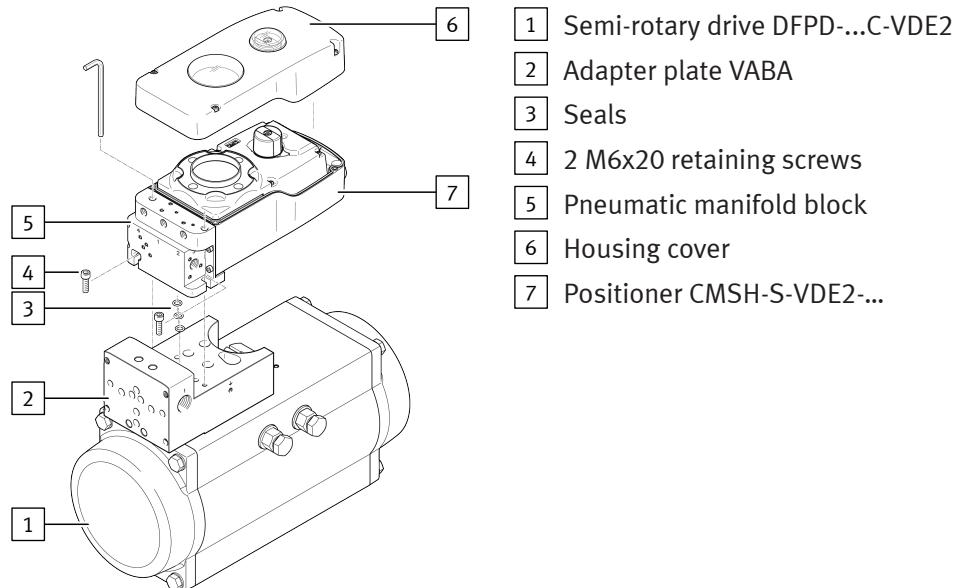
Mounting CMSH-S-VDE2... on adapter plate VABA of valve terminal VTOP
